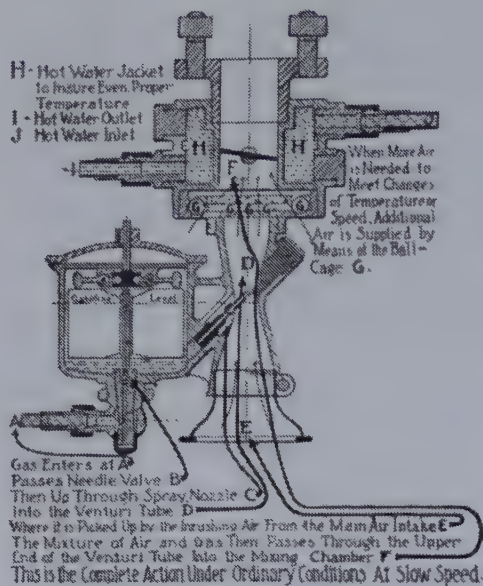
The G. & A. Carburetor with a side float—gasoline entering at bottom. This float is similar to the float on the carburetor working model. The air intake of this carburetor is controlled by balls instead of springs. The jet is a single "spray" jet.
